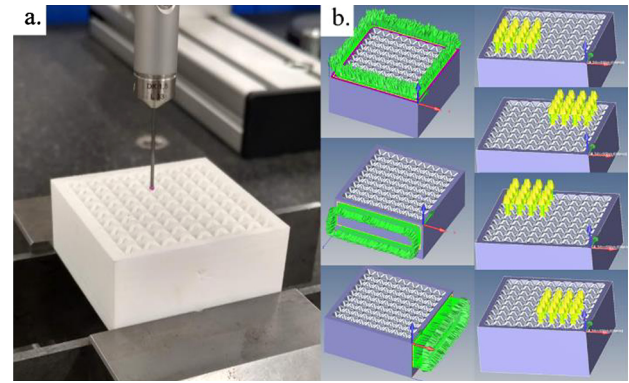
CMM measurement setup (a.) Example probing scenario (b.) Probing paths for the datum surfaces and measurand (split into four quadrants).
